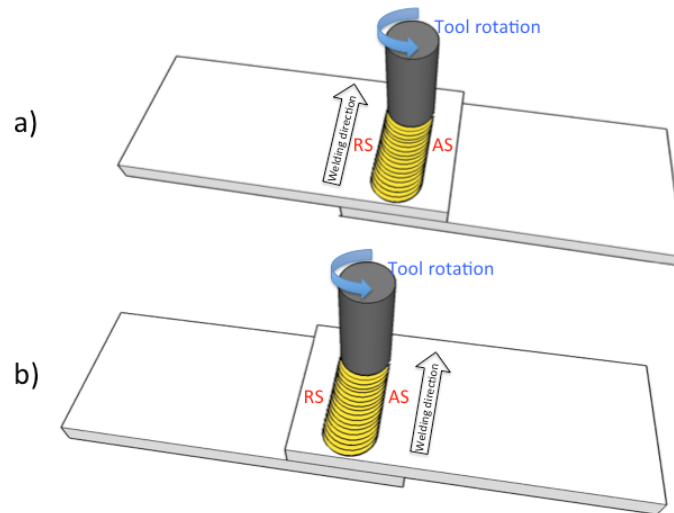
Coupon layout of friction stir lap welding; a) retreating side, b) advancing side.
